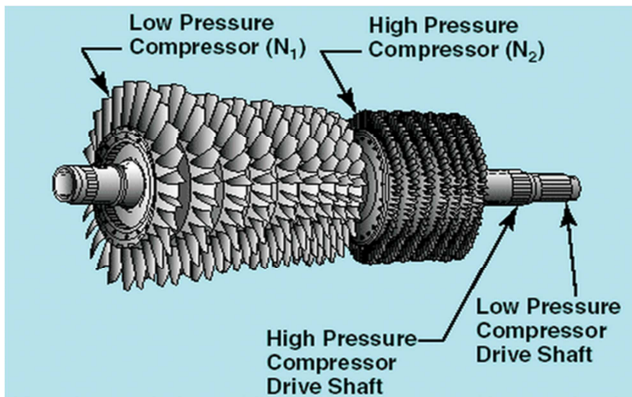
Typical Compressor Blade of an Aircraft gas turbine engine [13].
